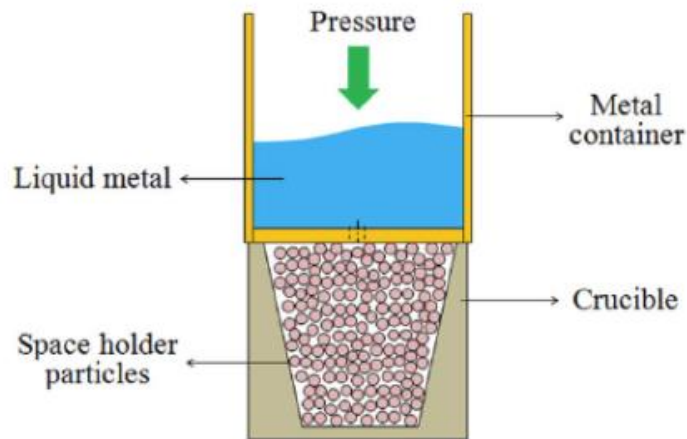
Schematic of the container/mould equipment used for processing aluminium "foams" with open pores, according to [27]
